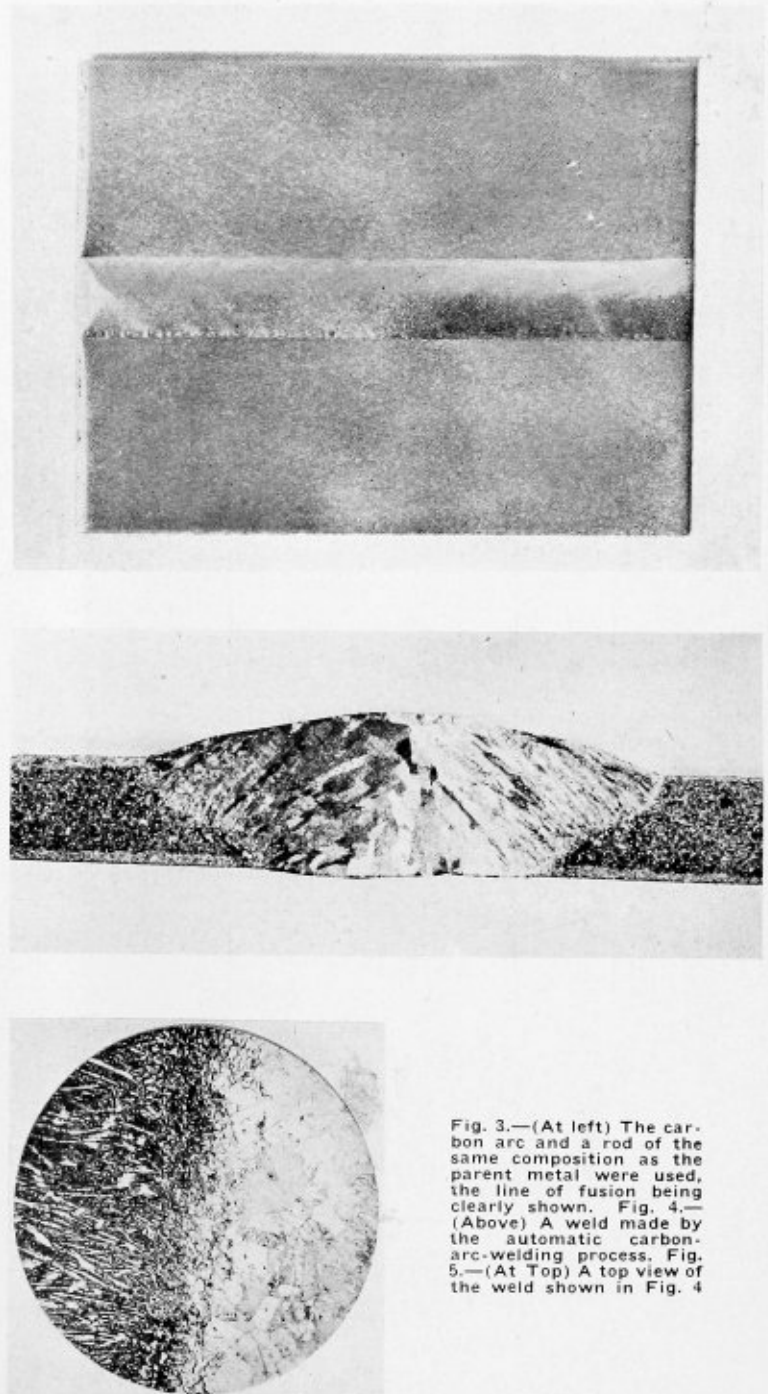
(At left) The carbon arc and a rod of the same composition as the parent metal were used, the line of fusion being clearly shown. Fig. 4.—(Above) A weld made by the automatic carbon-arc-welding process. Fig. 5.—(At Top) A top view of the weld shown in Fig. 4
